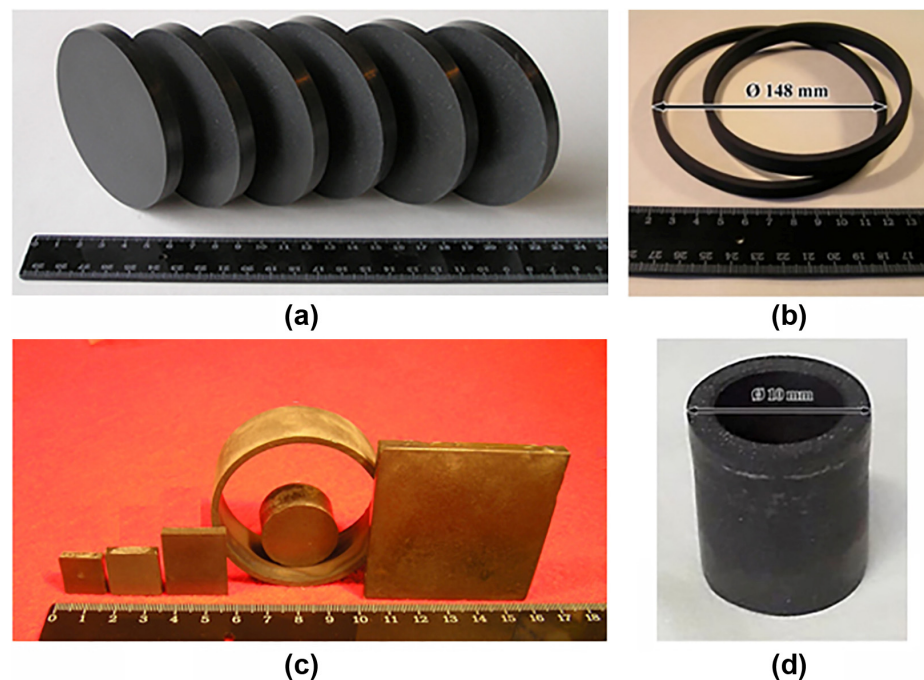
Examples of MgB₂ bulk superconductors: (a)—obtained using HotP, (b) [120], (c) — obtained using HP and then the rings were cut mechanically, and (d)—obtained by machining a bulk cylinder manufactured using SPS [26].
